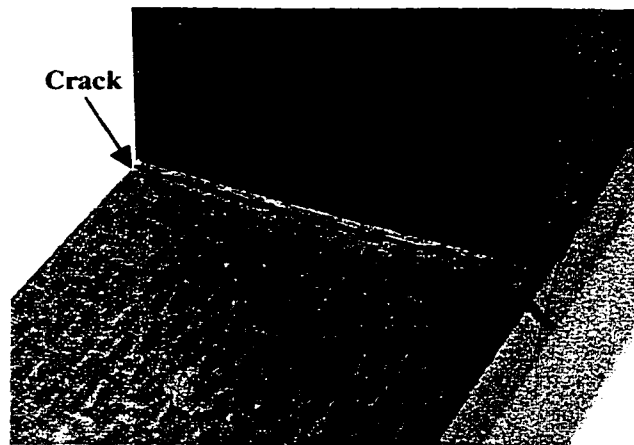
Typical Failed T-Joint Flexure Specimen.
